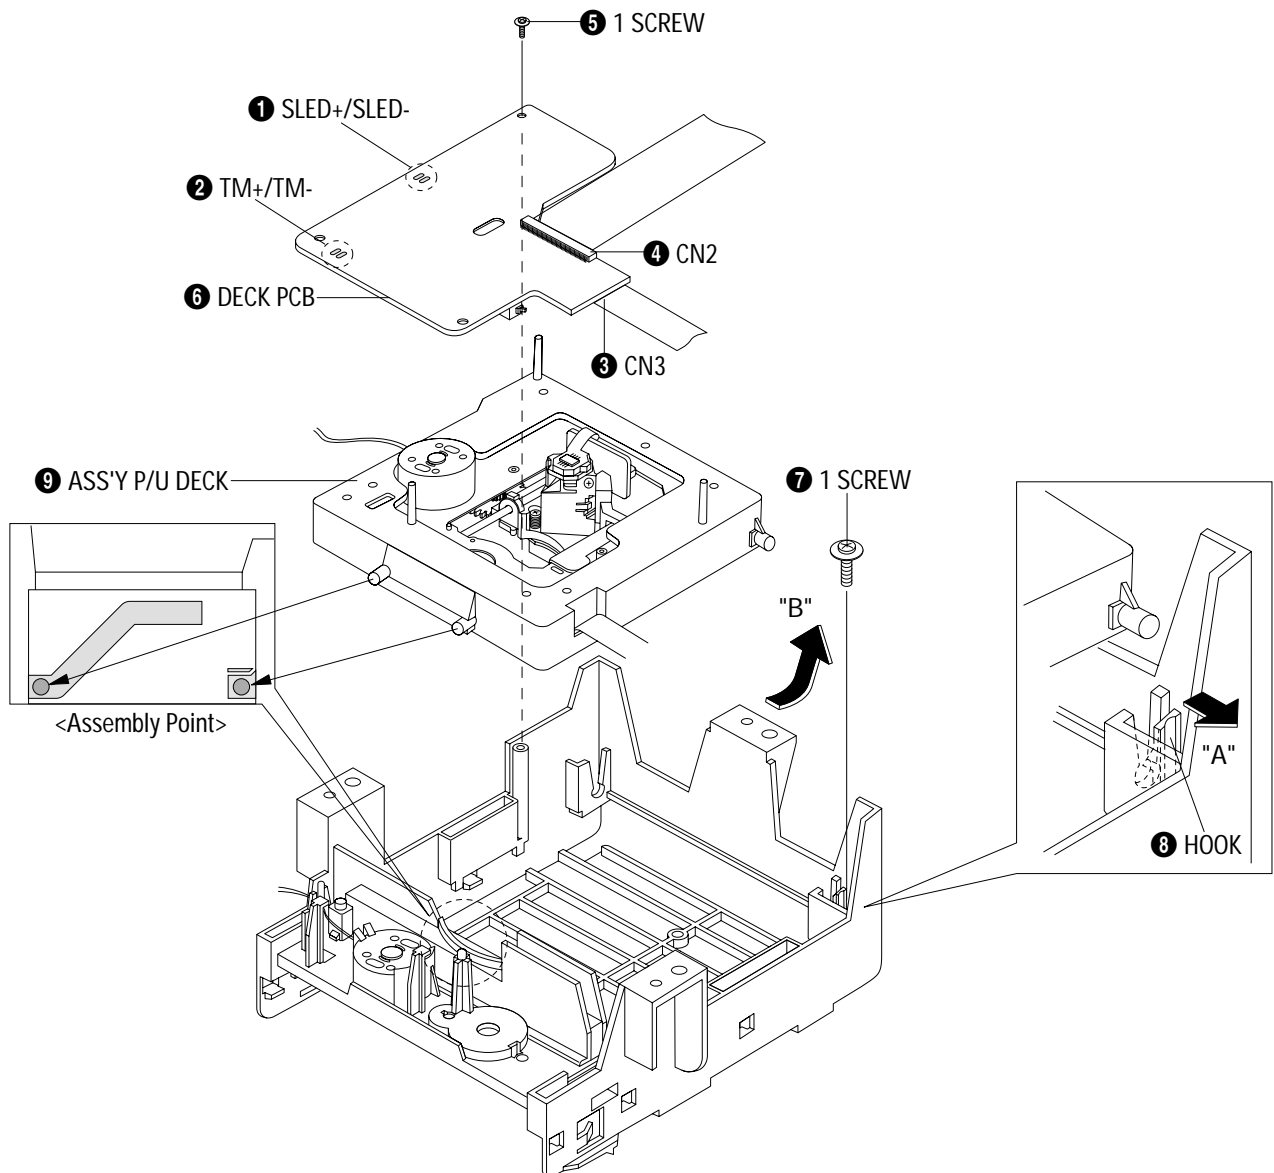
PCB Deck Ass'y and Ass'y P/U Deck Removal
